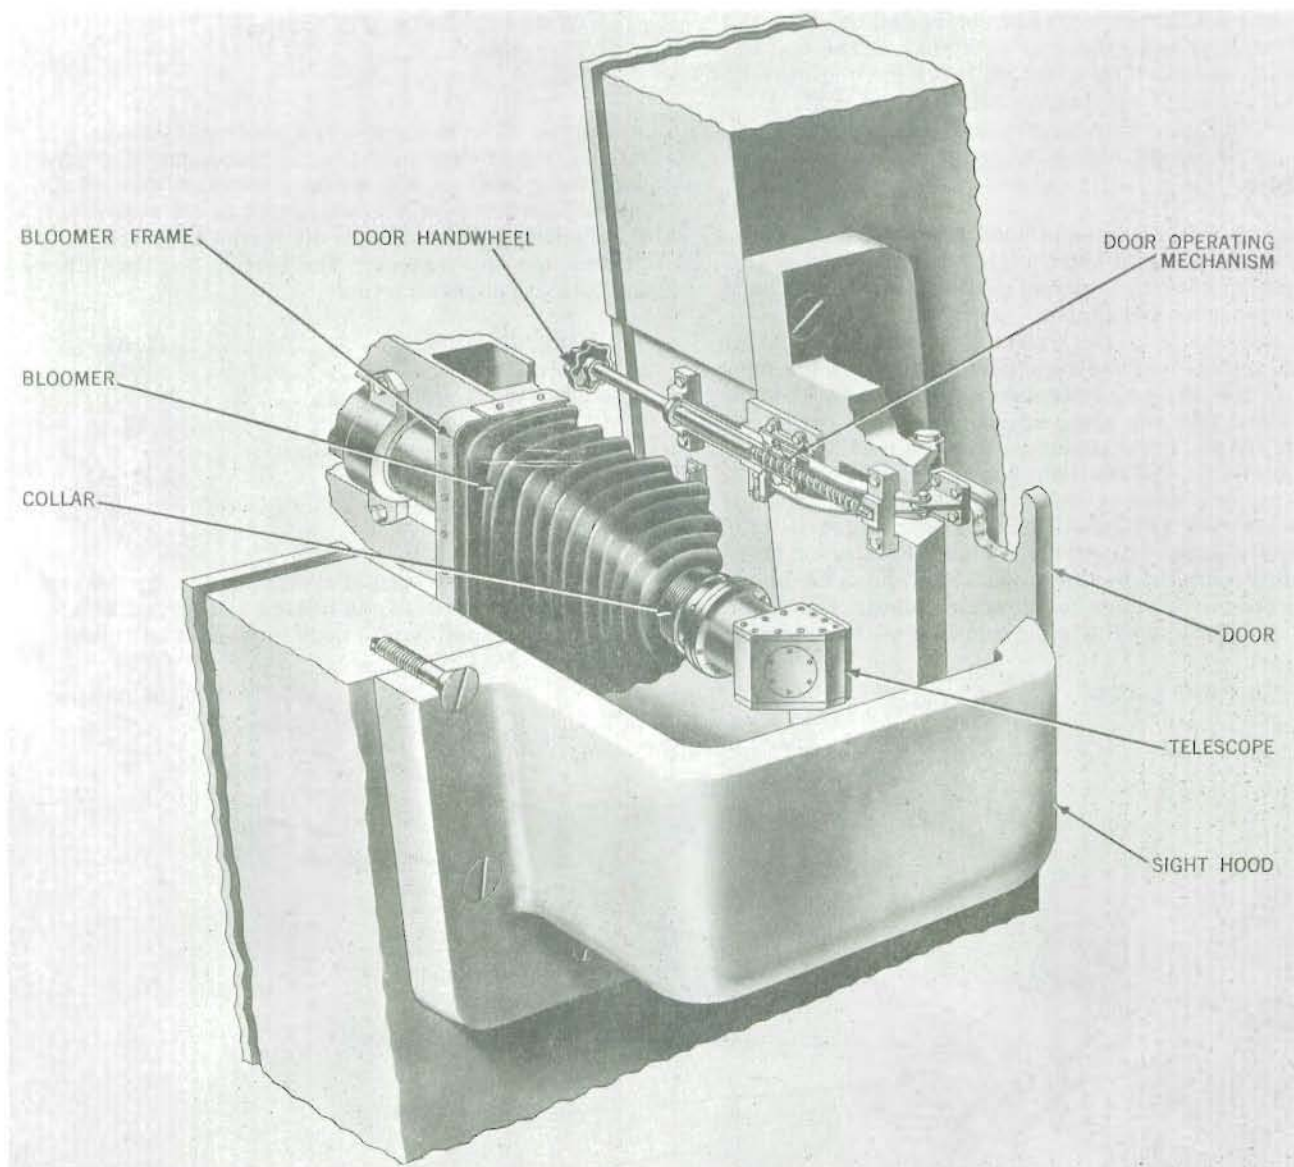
Sight Pointer's Sight Hood, Sectional View
